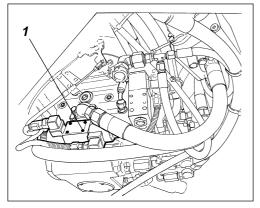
Vibrator pump 1. Hexagonal screws, 4x
